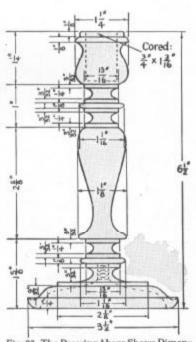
The Drawing Above Shows Dimensions for Making Colonial Candlestick.
